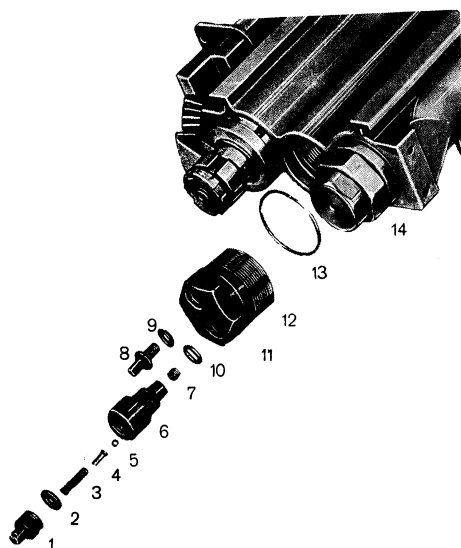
COMPENSATOR CYLINDER STUFFING BOX WITH BRAKE FLUID REFILLING VALVE — DISMANTLED
